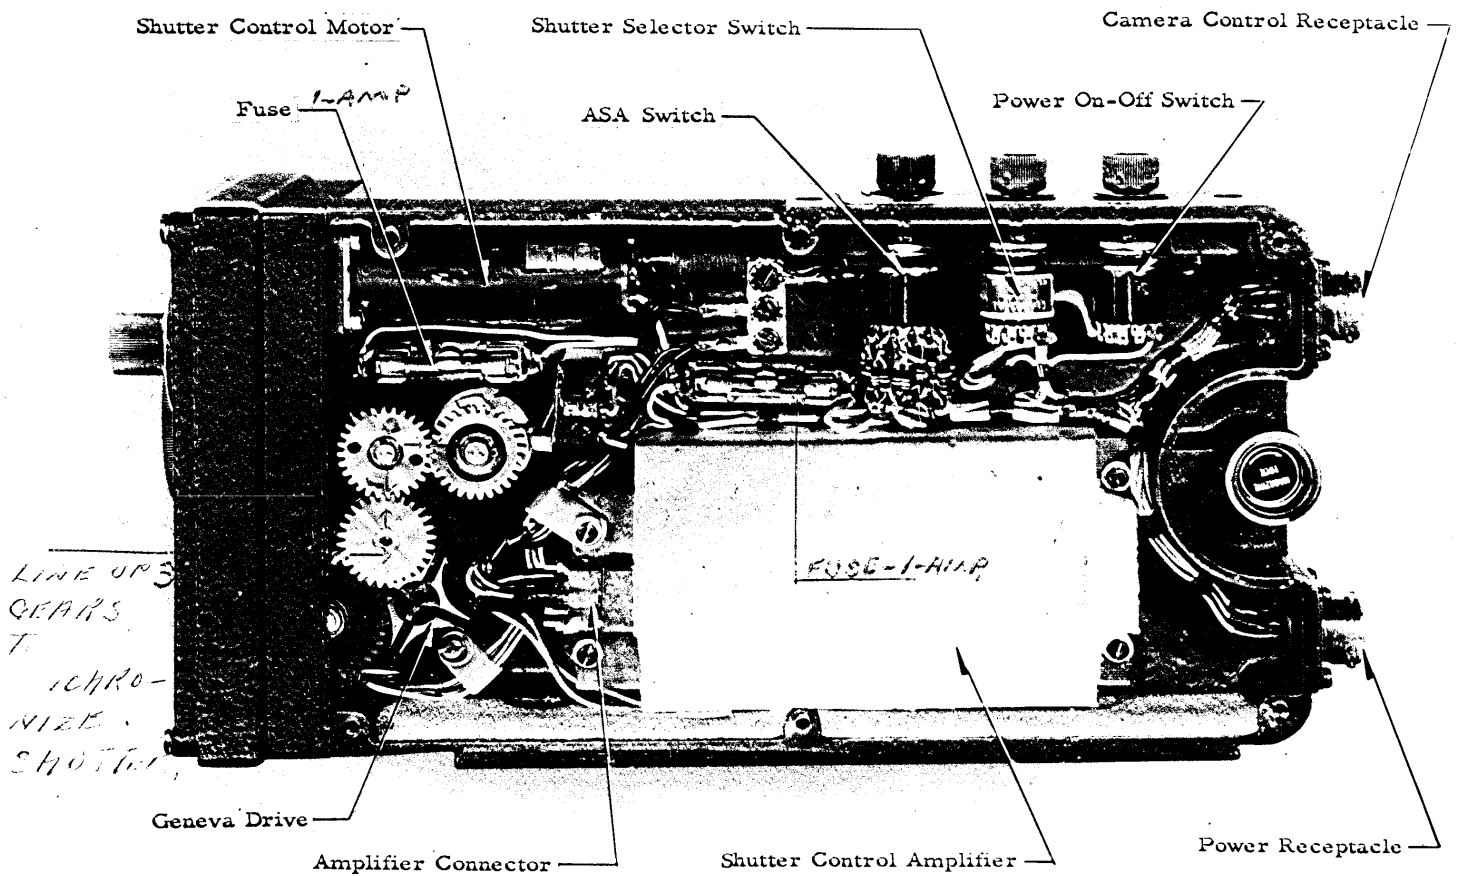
VIEW OF CAMERA WITH COVER REMOVED
